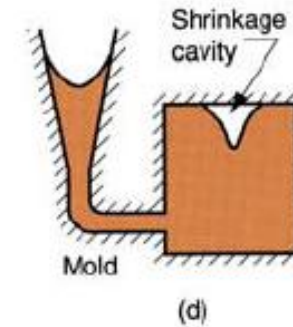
Some common defects in castings: (d) shrinkage cavity
